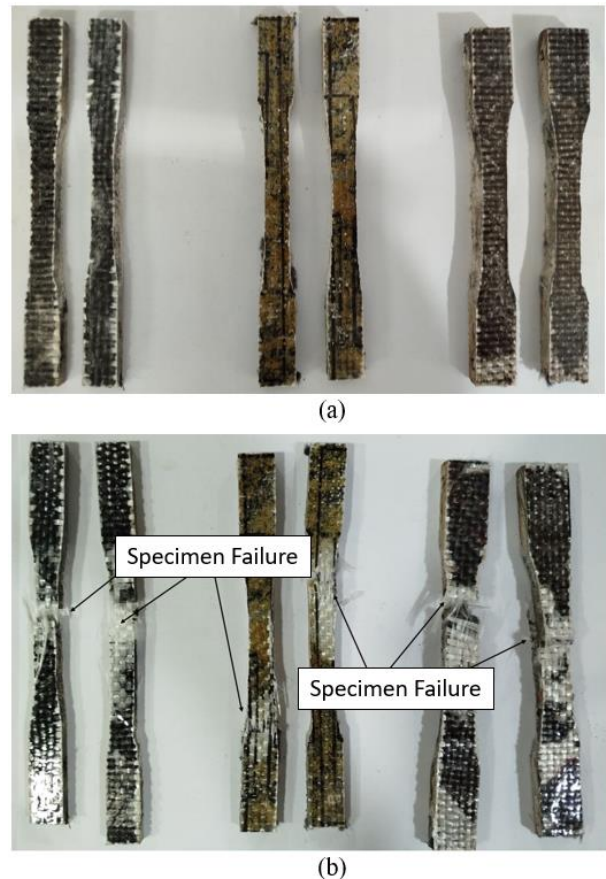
(a) Specimens before tensile test, (b) Specimens after tensile test
